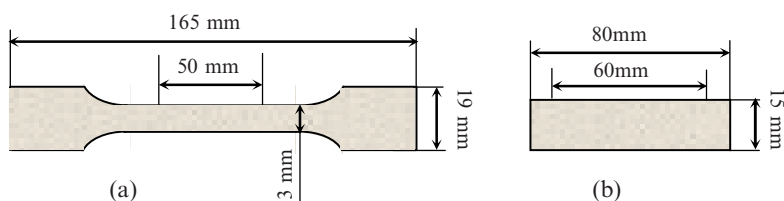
Specimen dimensions for: (a) tensile tests ($h = 3$ mm), (b) bending tests ($h = 4$ mm)
